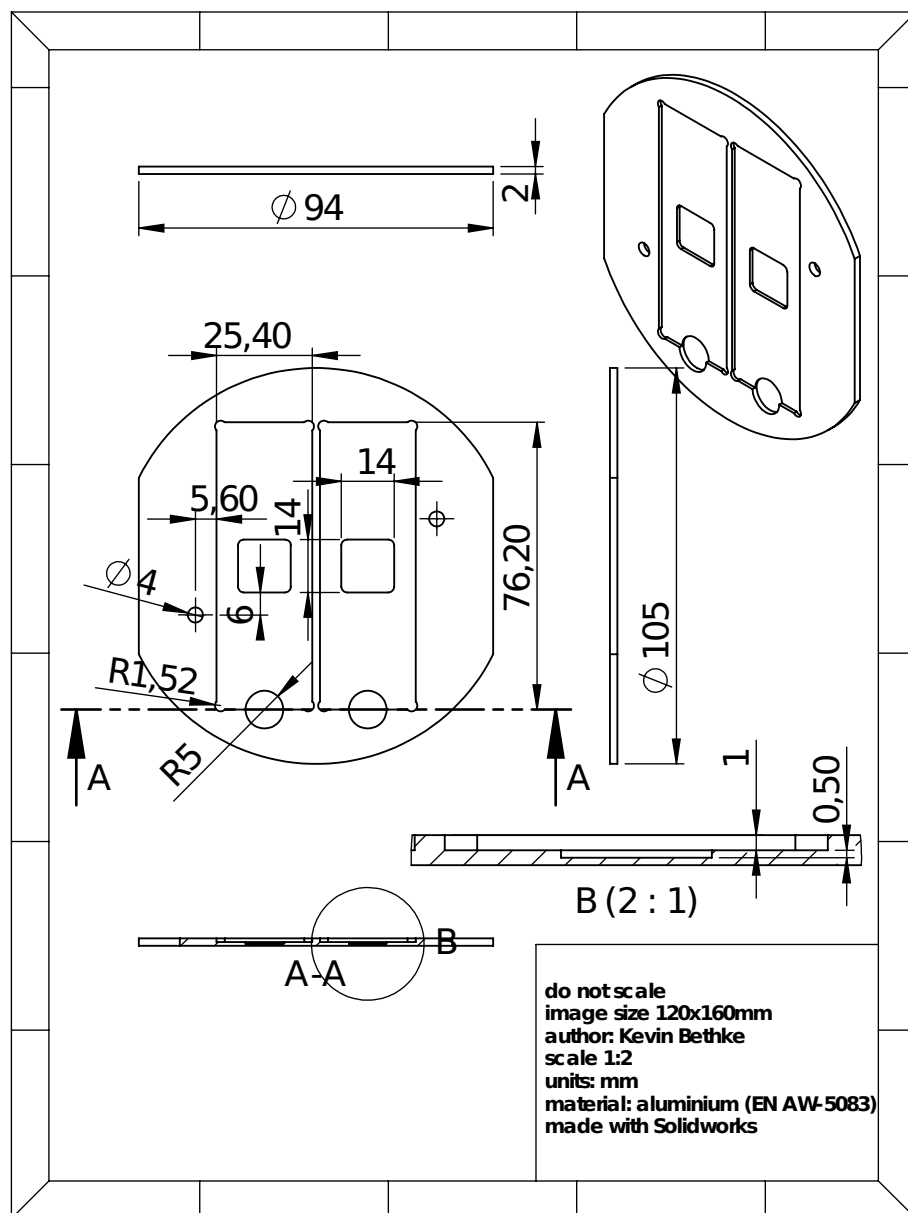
Technical drawing of the milled sputter mask for the preparation of thin film samples.
